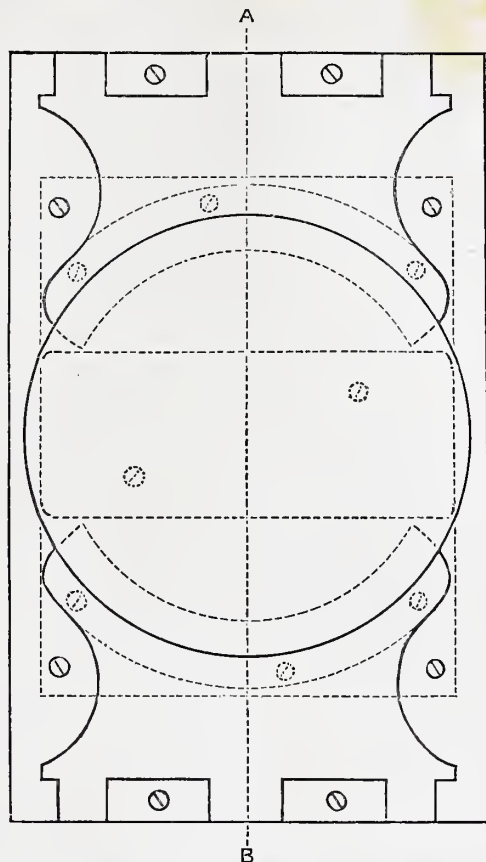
Diagram showing Method of Mounting Uprights and Segments in Lathe for turning them out of Solid Piece.
